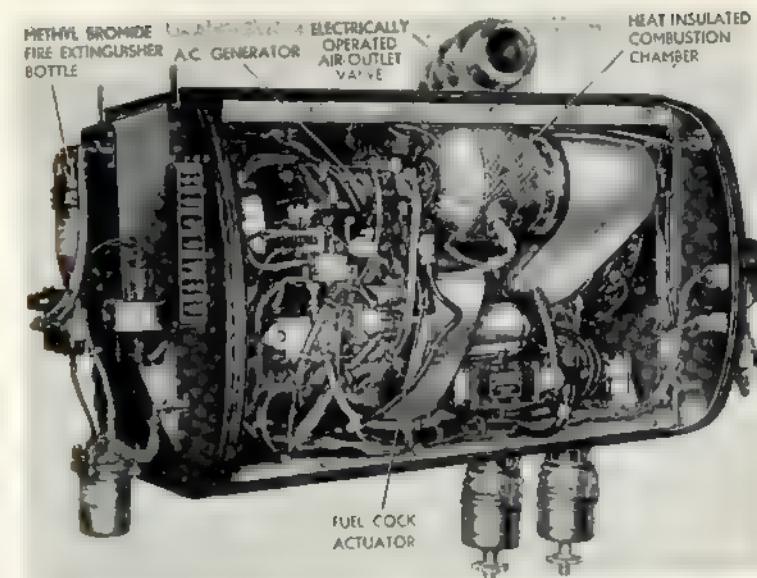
Auxiliary generating plant powered by a gas-turbine engine and providing 32 kW, three-phase power, or compressed air. Weight 400 lb. Dimensions, 53 x 38 x 24 in. Specific fuel consumption 1.4 lb. per b.h.p. per hour at the turbine shaft.
